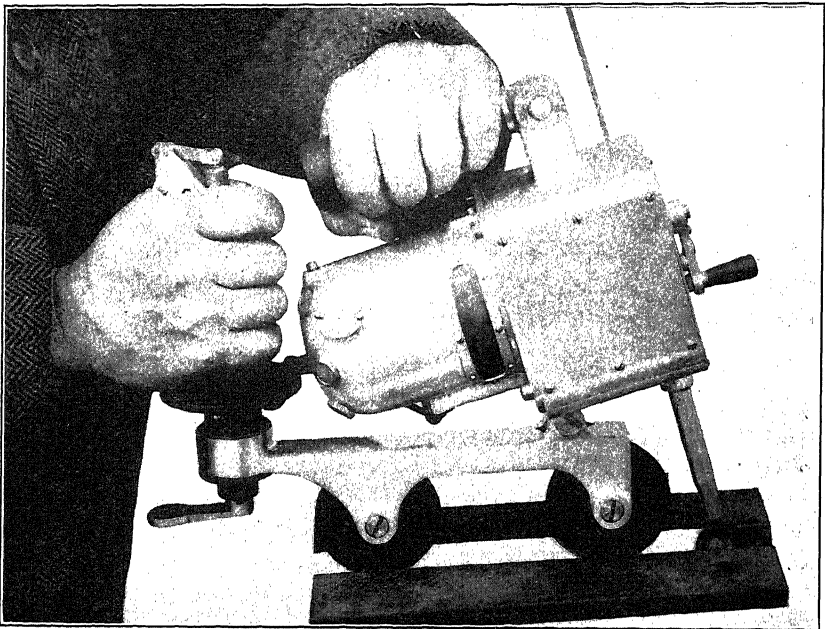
MORTON SEMI-AUTOMATIC METALLIC-ELECTRODE ARC-WELDING MACHINE. THE ELECTRODE IS AUTOMATICALLY FED TO THE ARC, WHICH IS AUTOMATICALLY MAINTAINED, WHILE THE MACHINE IS MANUALLY MOVED ALONG THE GROOVE TO BE WELDED.
